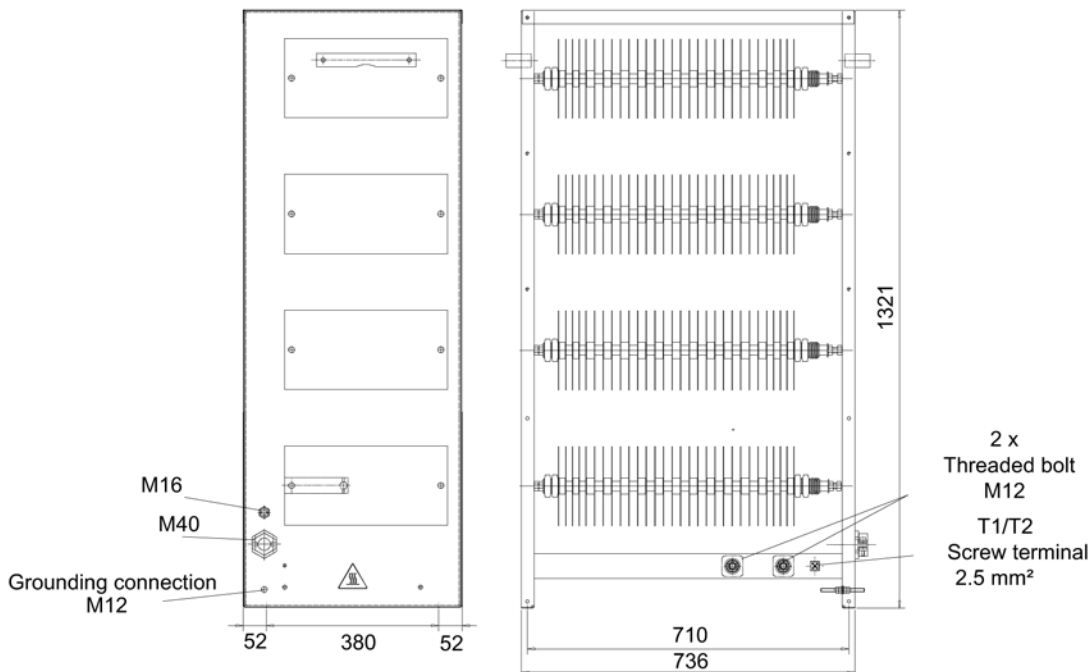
Dimension drawing for braking resistor (50 kW)
